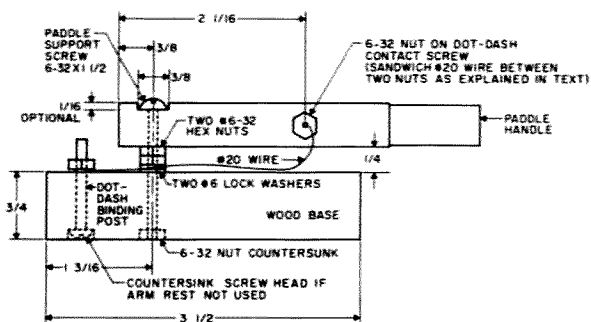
Assembly of paddle to base. This side view shows the main support screw detail.
